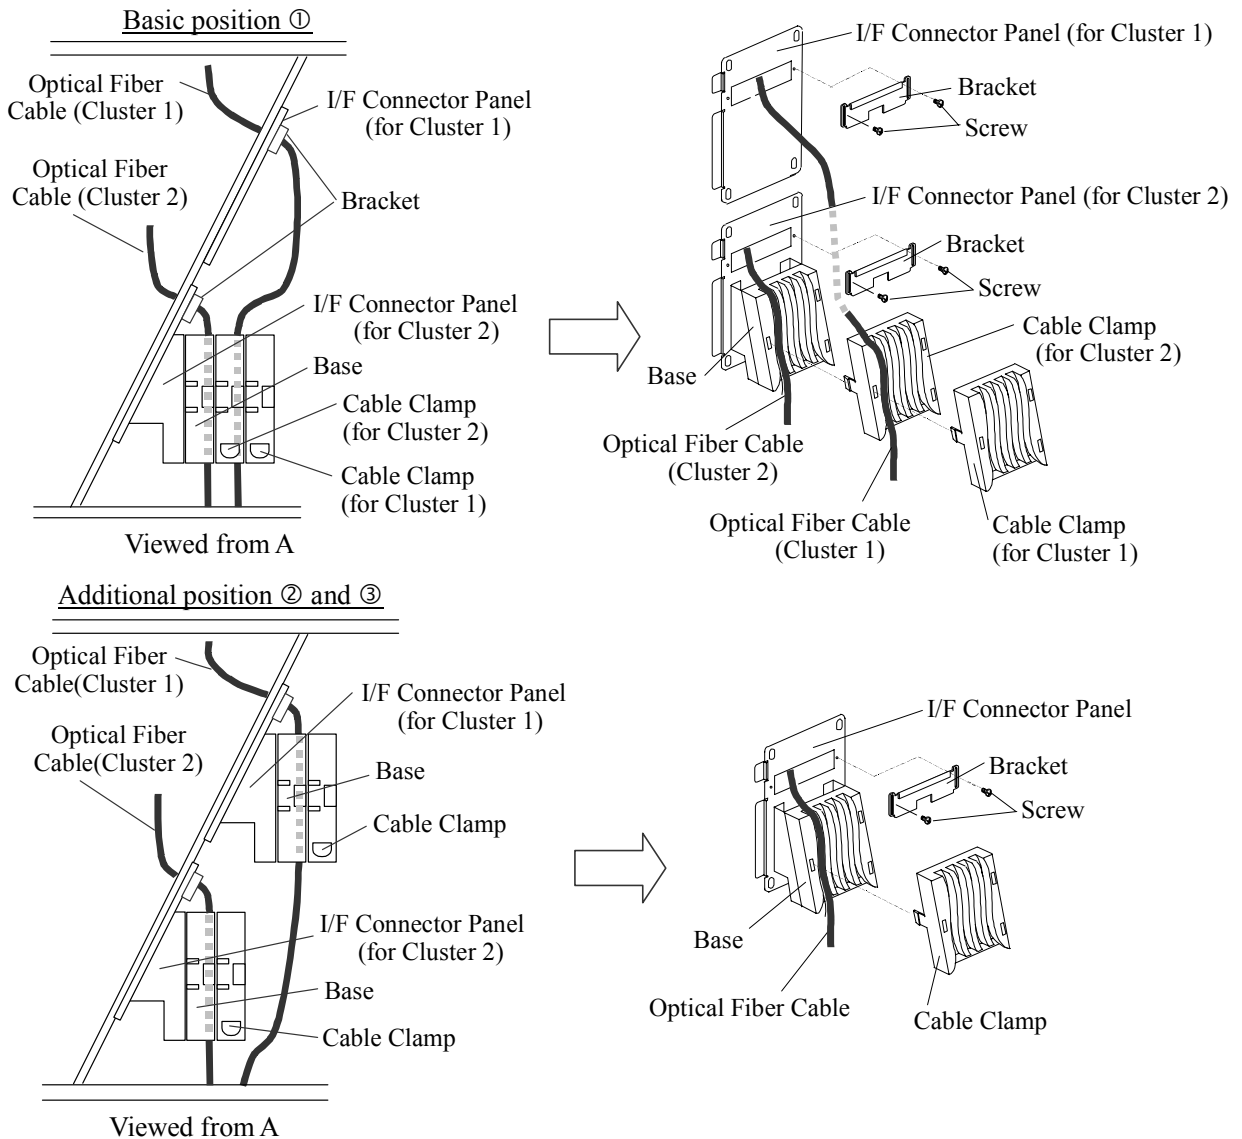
Installation of Optical Fiber Cable
